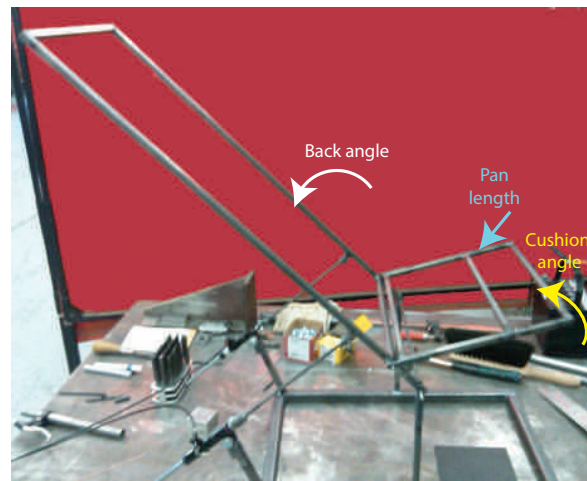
Fabrication of the reconfigurable CRS seating fixture. The seatback and seatpan from are adjustable independently. The seatpan can be adjusted to long and short lengths by removing the front section.
